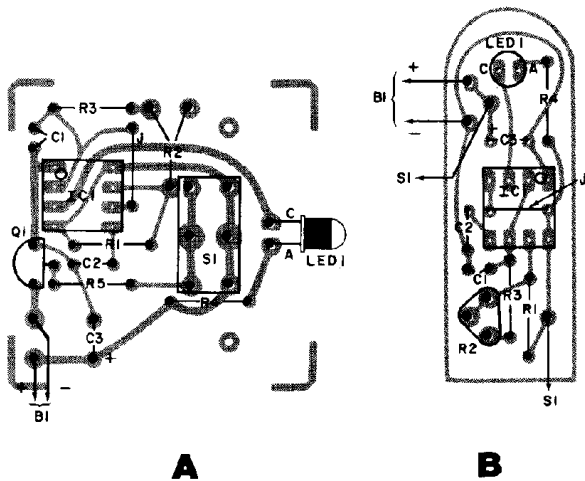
Parts placement guides for the box-style (A) and gun-style (B) infrared transmitters.
